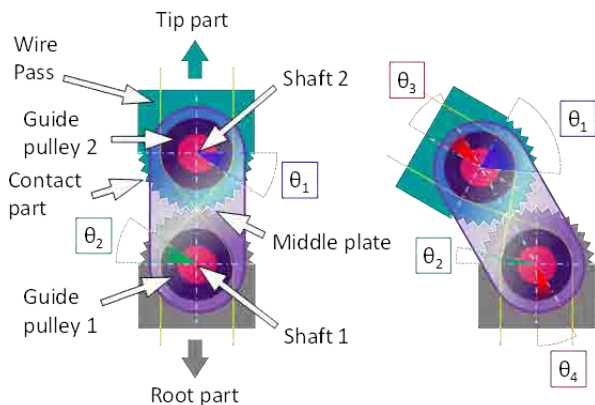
mechanism of bending joint to keep the path length of wires for the tip blade actuation [2]
